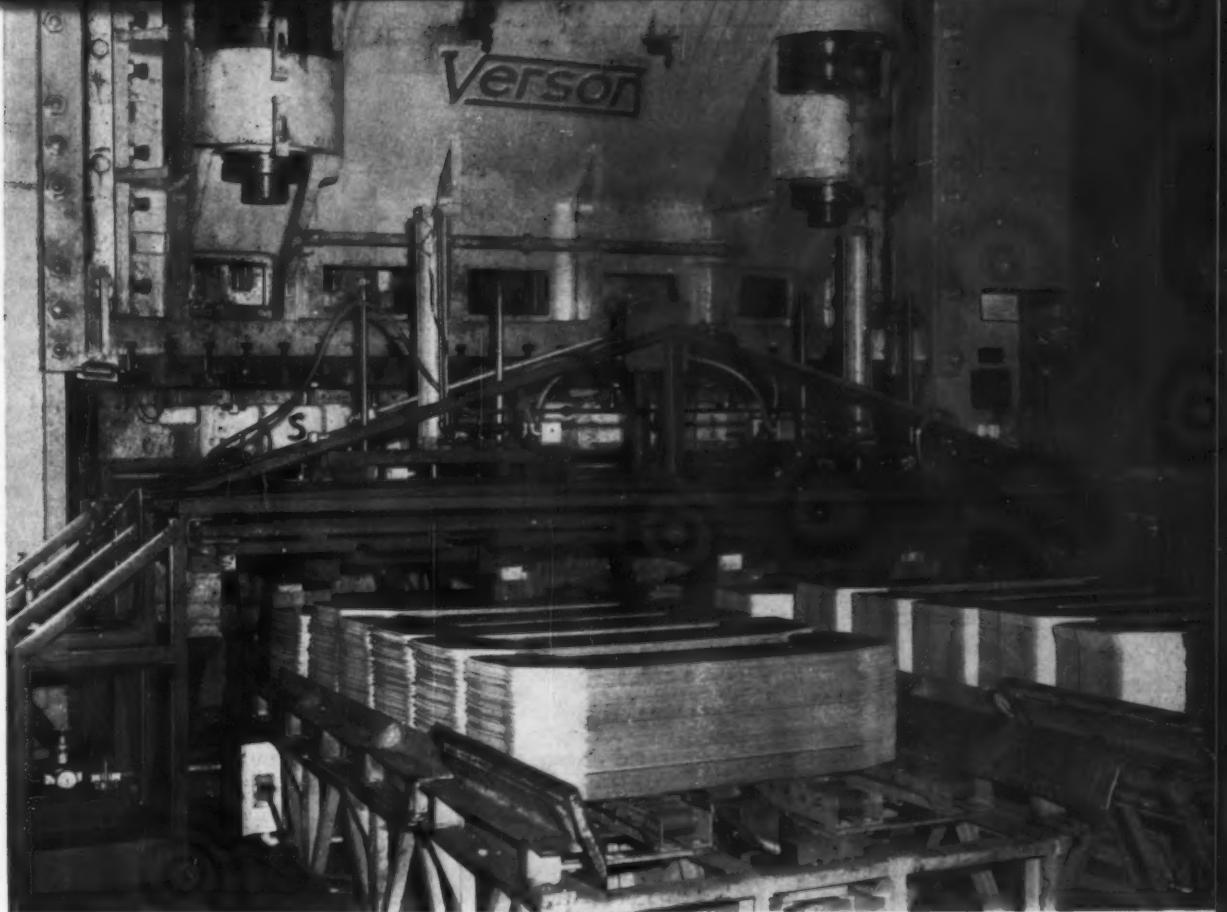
Press for Forming Center Section of Bumper. Stacked sheets have been belt polished, and coated with phosphate and a lubricant which protects surface during forming
